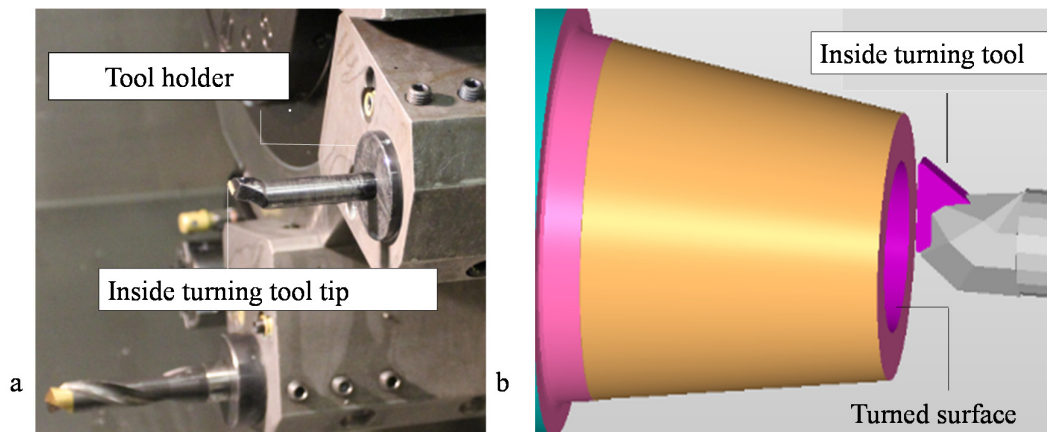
Illustration of inside turning (a) toolset-up (b) rough and finish cut.
